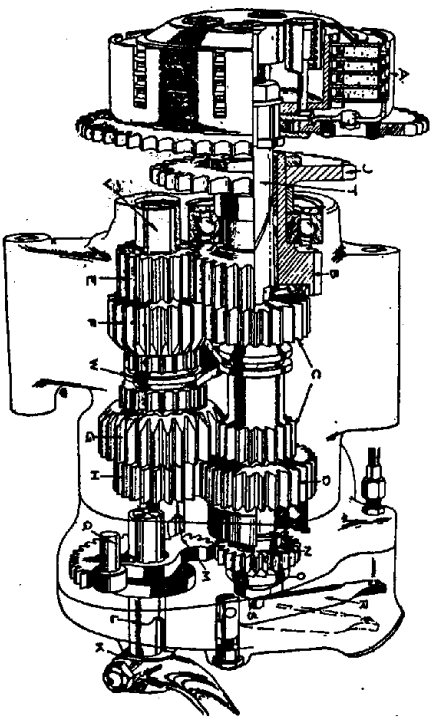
CUTAWAY VIEW OF THE C.P. GEARBOX FITTED TO 1950-51 MODELS.
